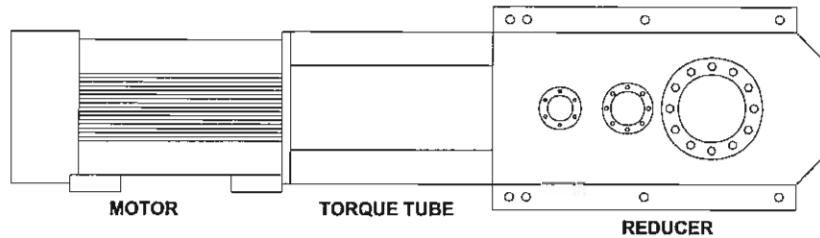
Side view of a typical torque tube variation to the right angle, shaft-mount drive assembly
